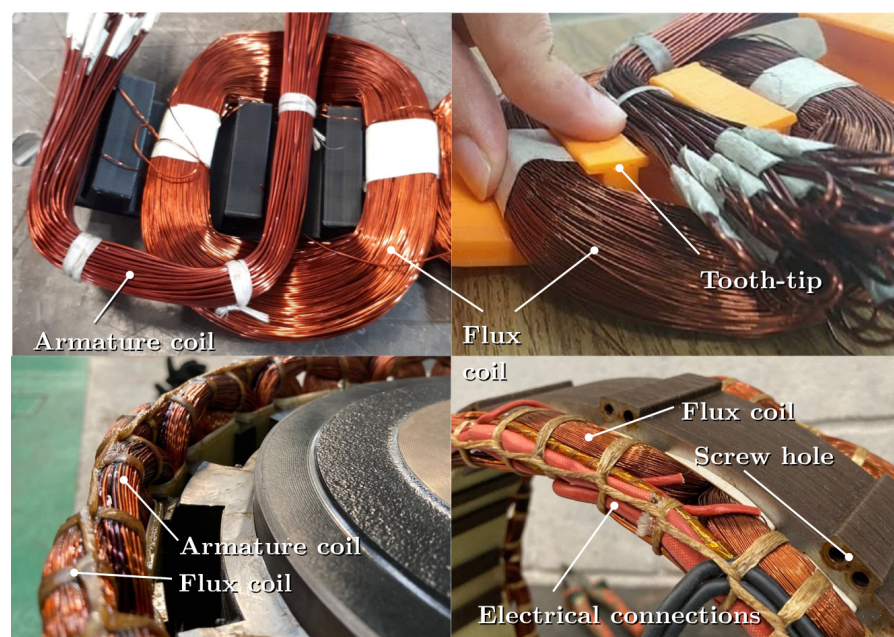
Manufacturing evaluation using a 3D-printed model, and final result in the built machine.
